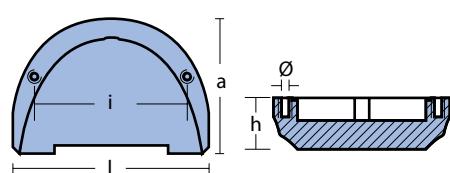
PLATE FOR ENGINES SX DRIVE / PLACCA PER MOTORI
